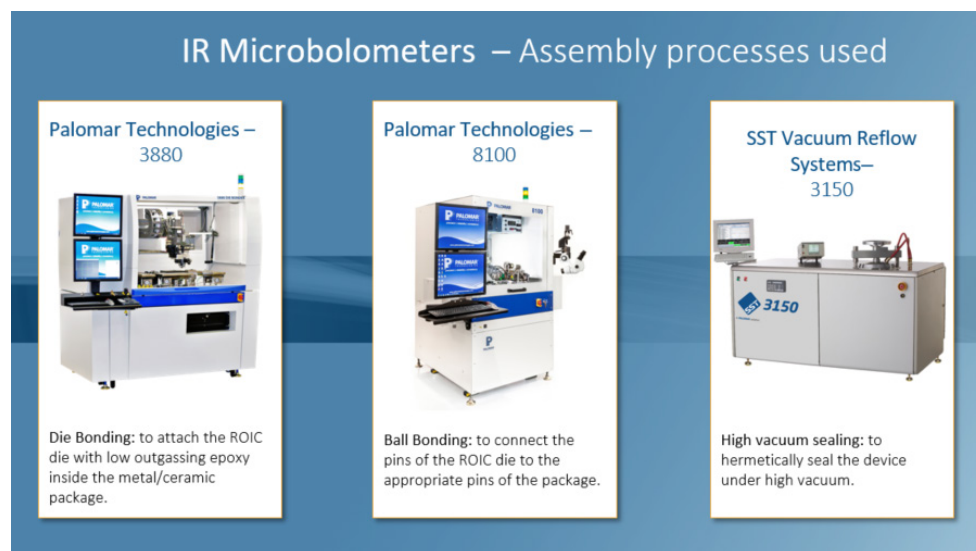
There are three main assembly processes utilized for the assembly the IR microbolometer: die bonding, wire bonding and vacuum sealing.
